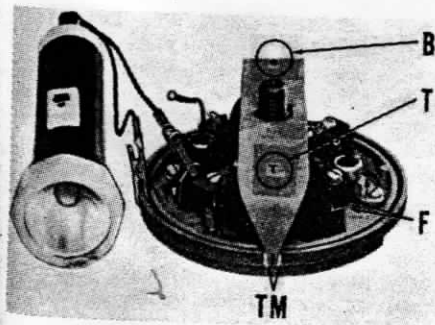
Timing fixture installed and aligned with armature plate timing marks (TM) for adjusting points for upper cylinder.
